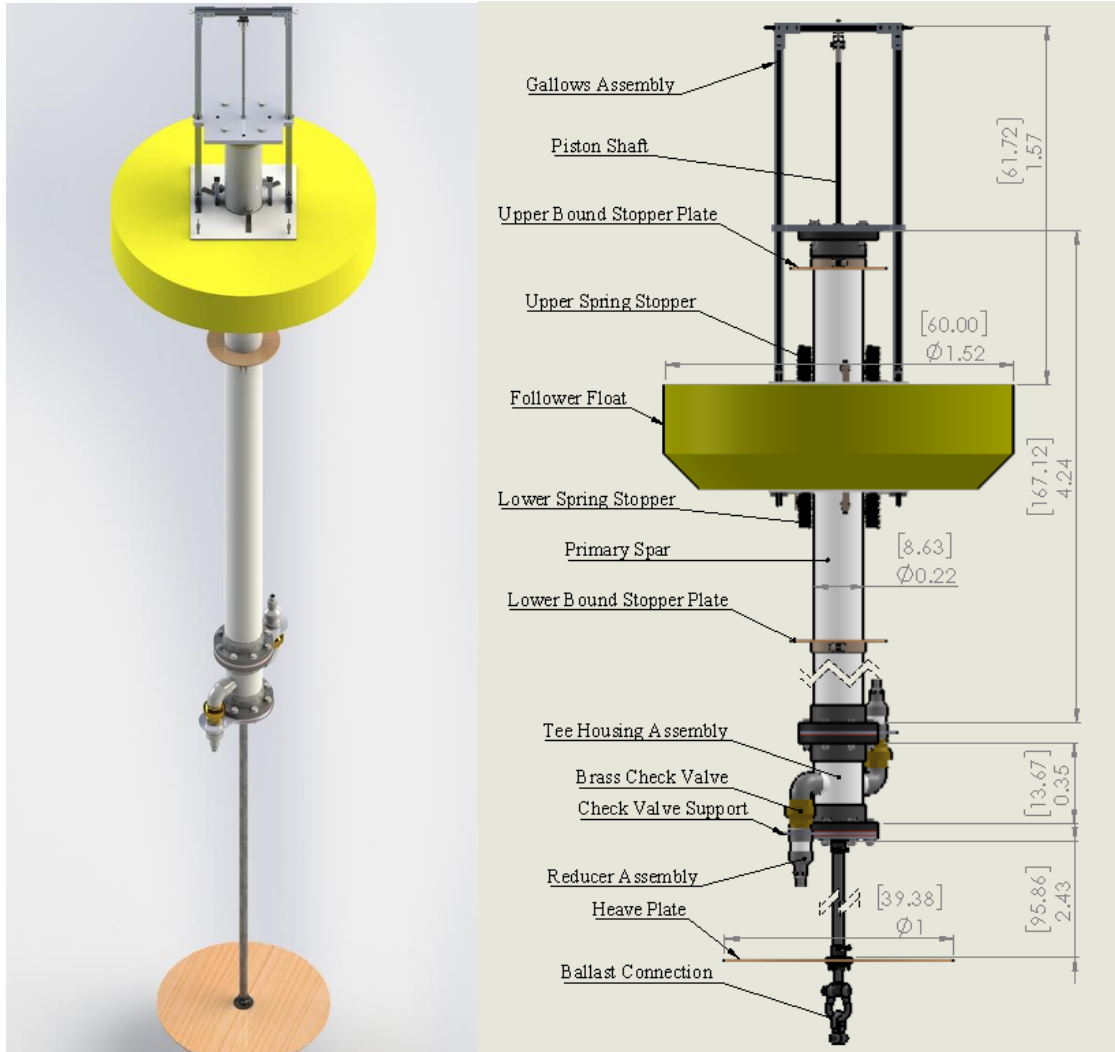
Final Solidworks model rendering (left) and dimensioned model drawing (right). Dimensions provided in meters [inches].
